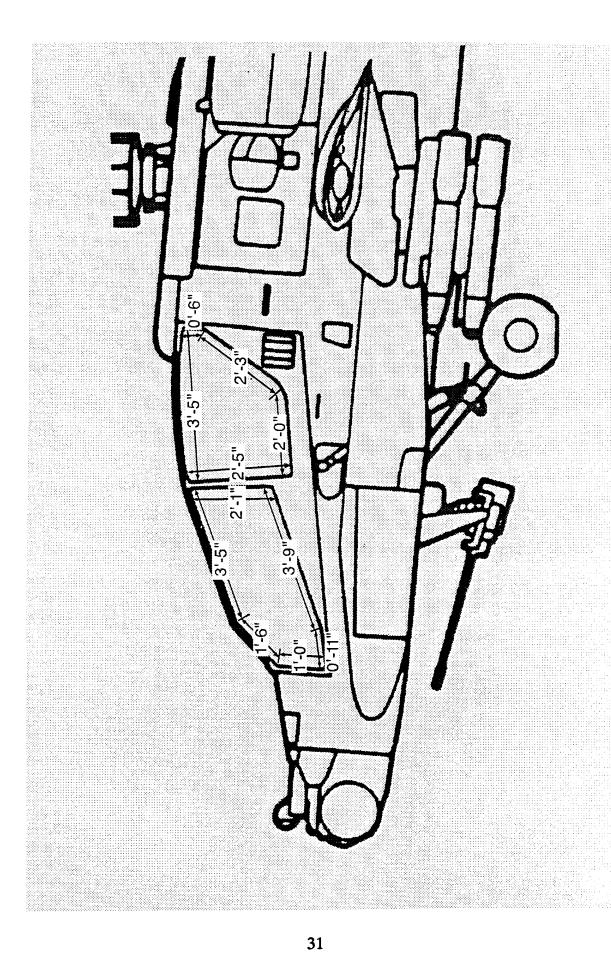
AH-64 Apache schematic showing dimensions of egress areas.
